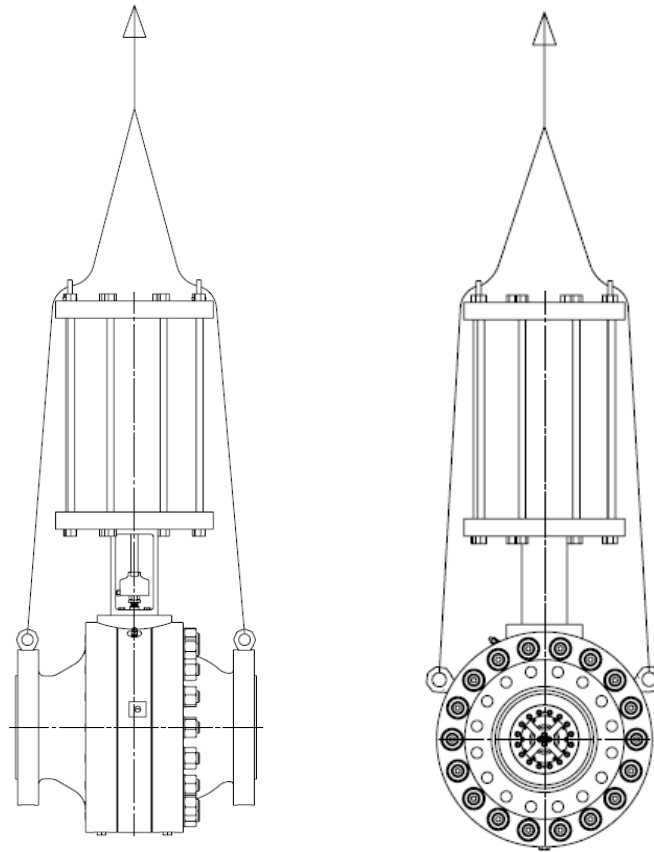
Preferred lifting arrangements when the valve assembly is packed in the Vertical position.
